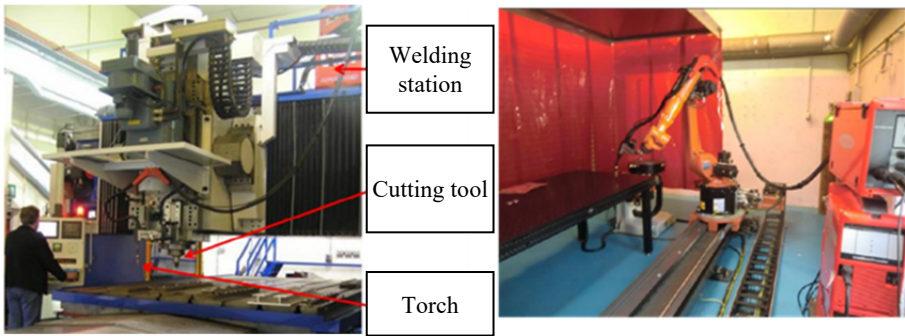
Positioning machines. Machining center (Cranfield University) and anthropomorphic robot with linear guidance (University of Montpellier)
